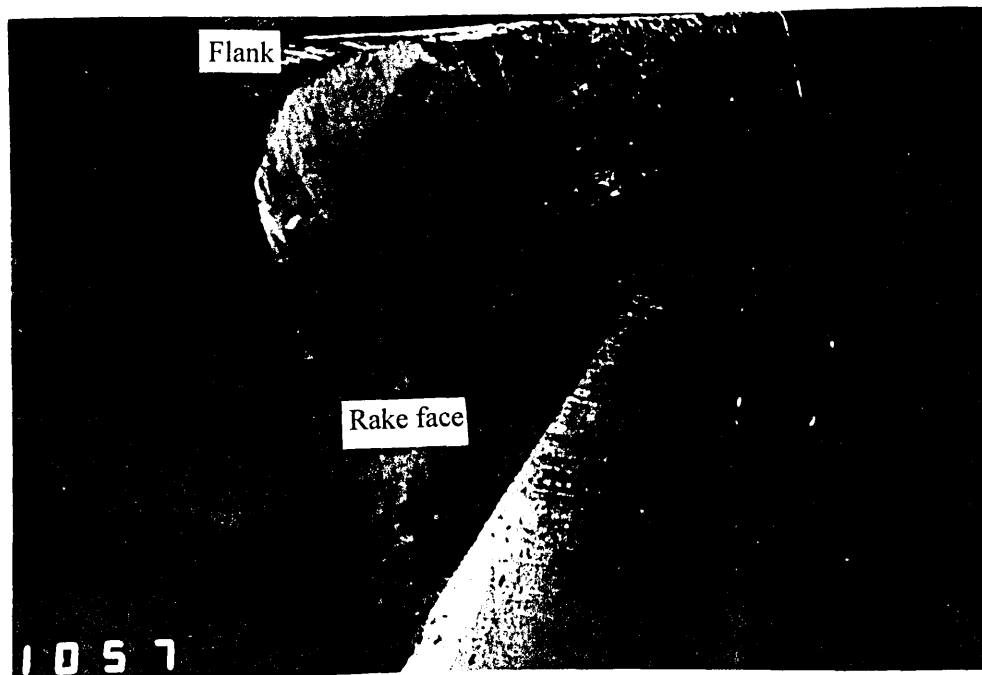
(a) The cutting edge on the finishing tooth of the TiN coated A1 segment when cutting mild steel
